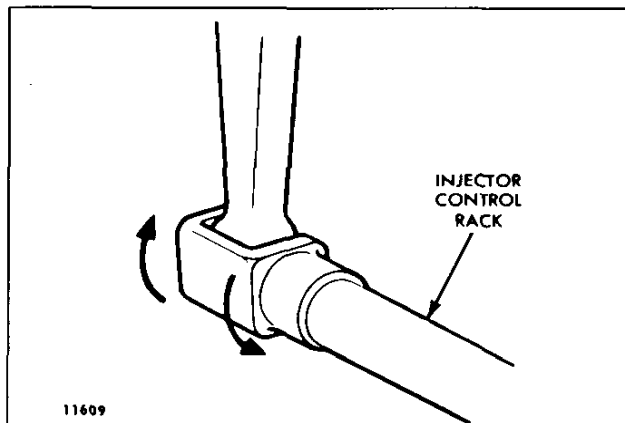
Checking Rotating Movement of Injector Control Rack
